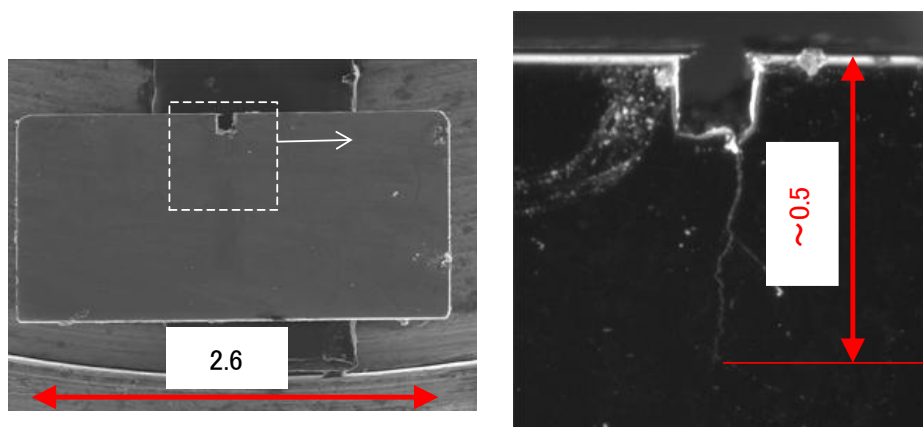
Schematic diagram of specimen for three-point bending cut from spot welded joint.
